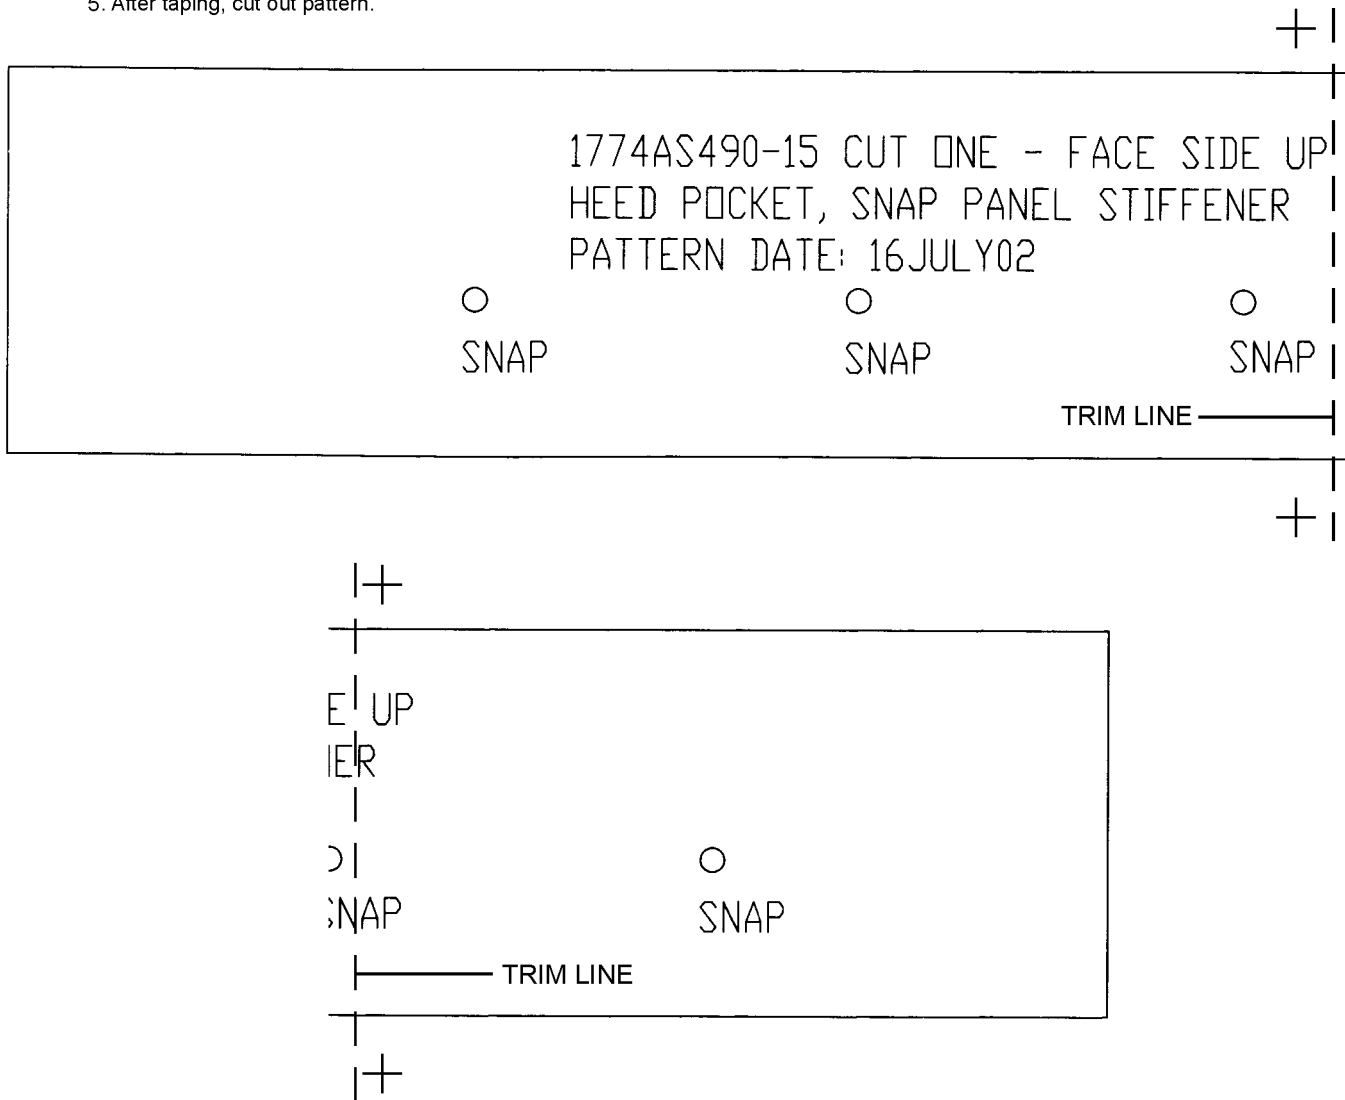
AF. HEED Pocket Support Panel Pattern (Sheet 4 of 4)
